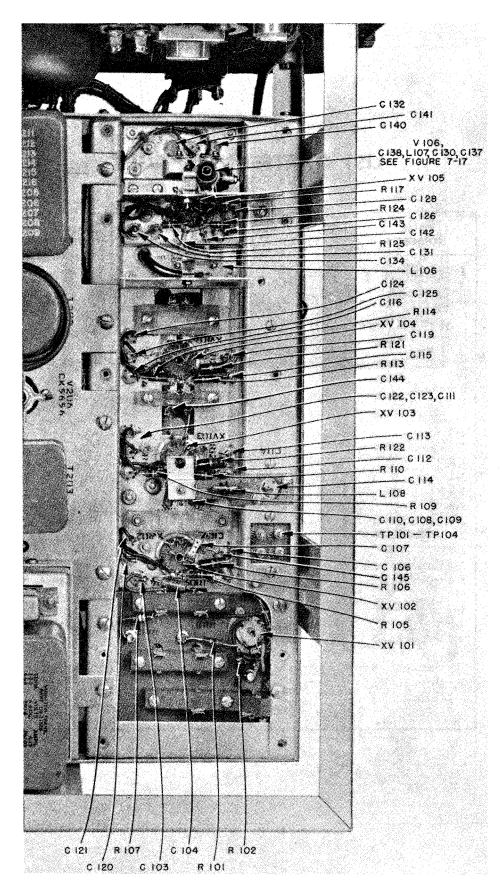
Underside of RF Chassis, Showing Component Locations.
